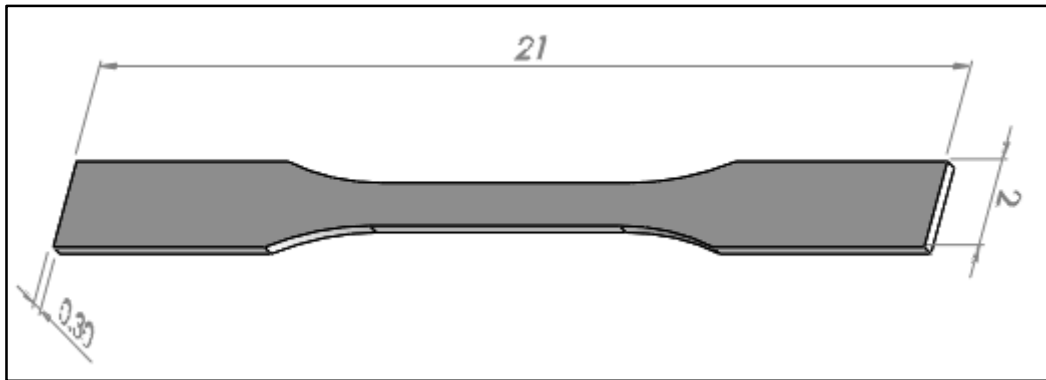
Generic dimensions of the micro-specimen (dimensions on millimeters).
